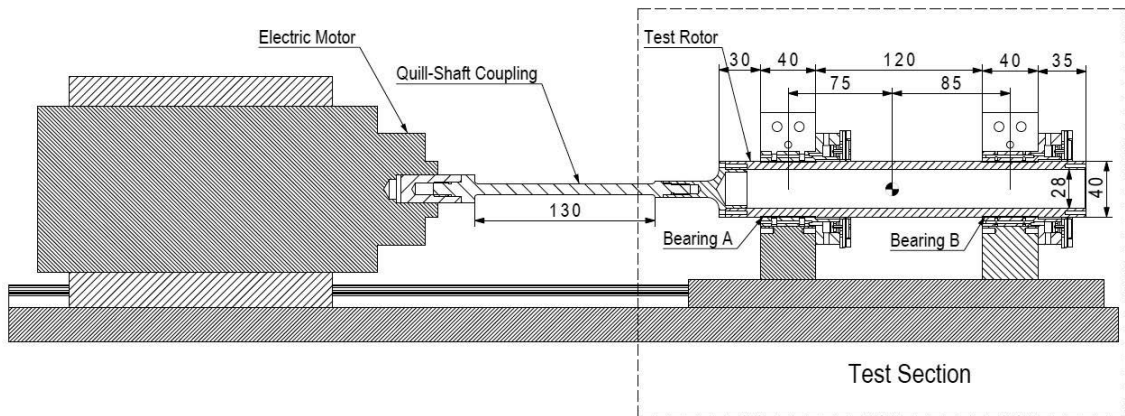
Gas bearing test-rig indicating the position of the test bearings, the rotor center of gravity, and the electric driving spindle (dimensions are in mm).
